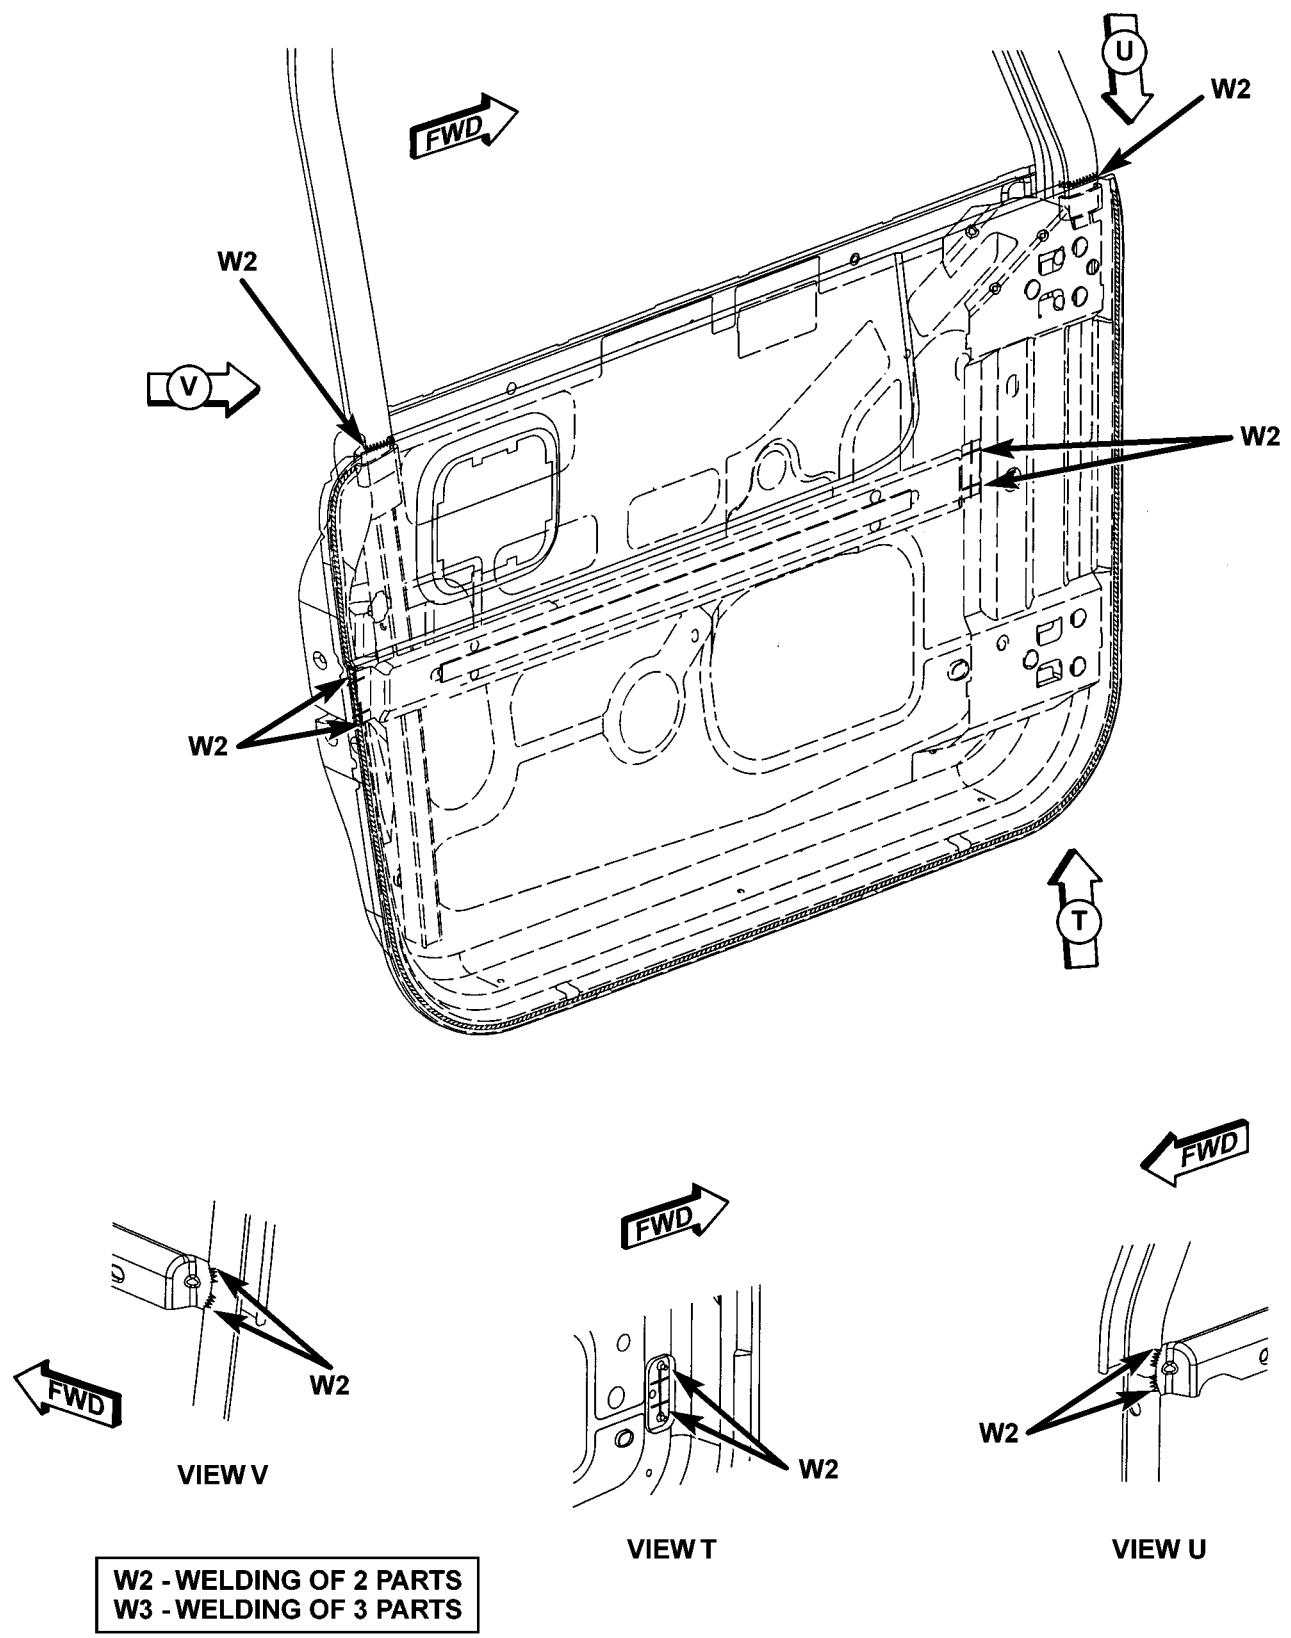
FULL DOOR ASSEMBLY (2 OF 2)
